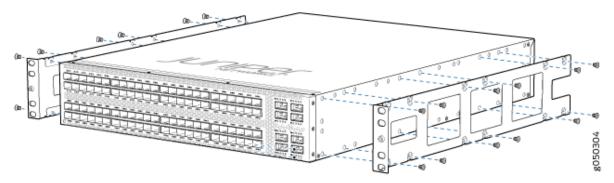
Attaching Mounting Rails to the QFX5100-96S
